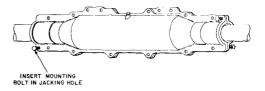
Splice Case Jacking Holes With Mounting Bolts in Place
